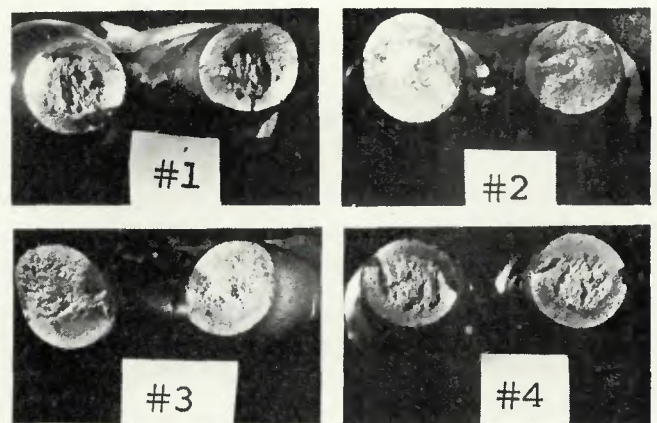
Fracture surfaces of tensile test specimens from an aluminum electron beam weld
